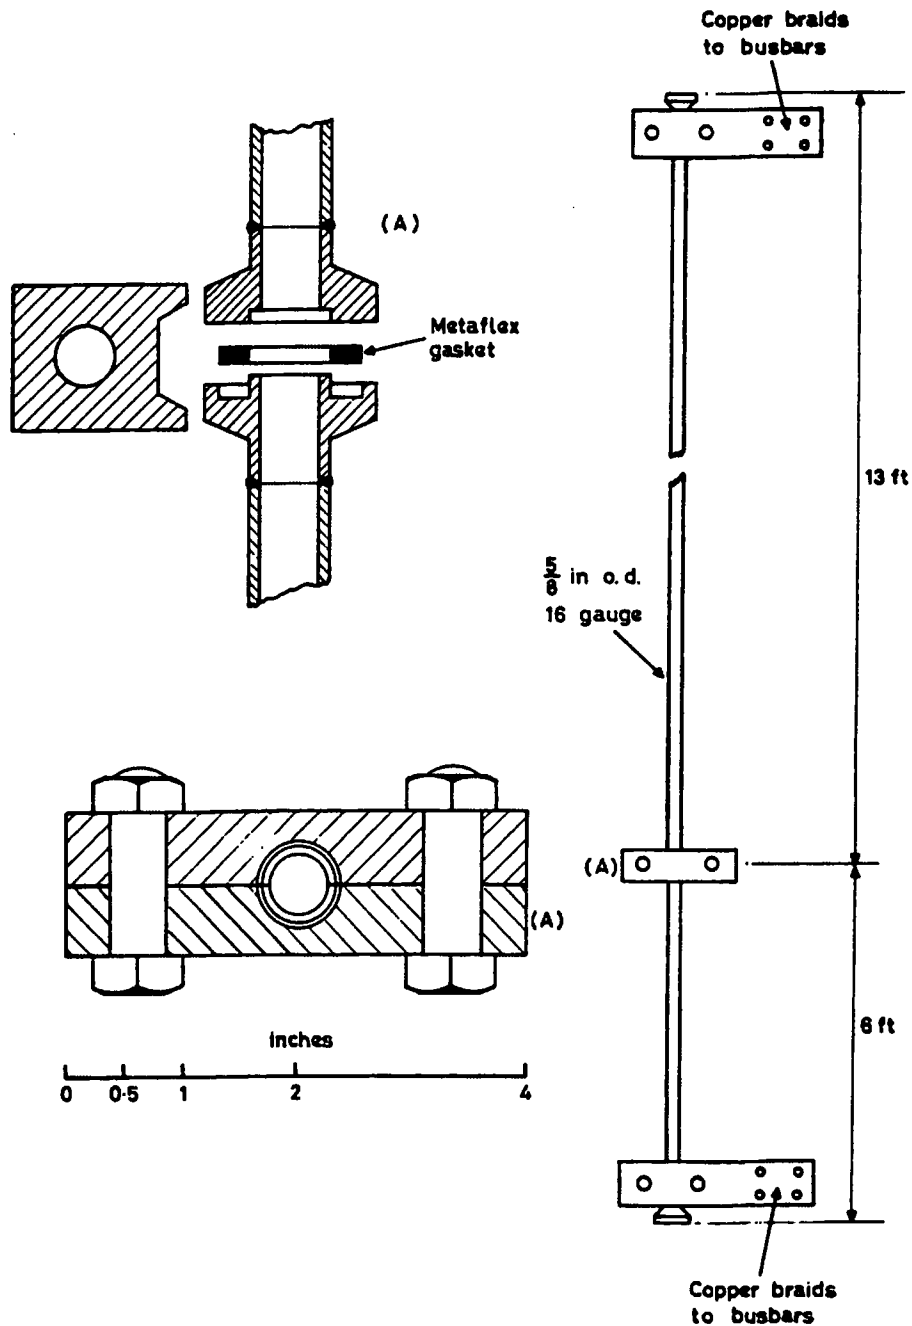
Diagram of Test Section and Flange Arrangement for the Bennett Heated Tube Tests
